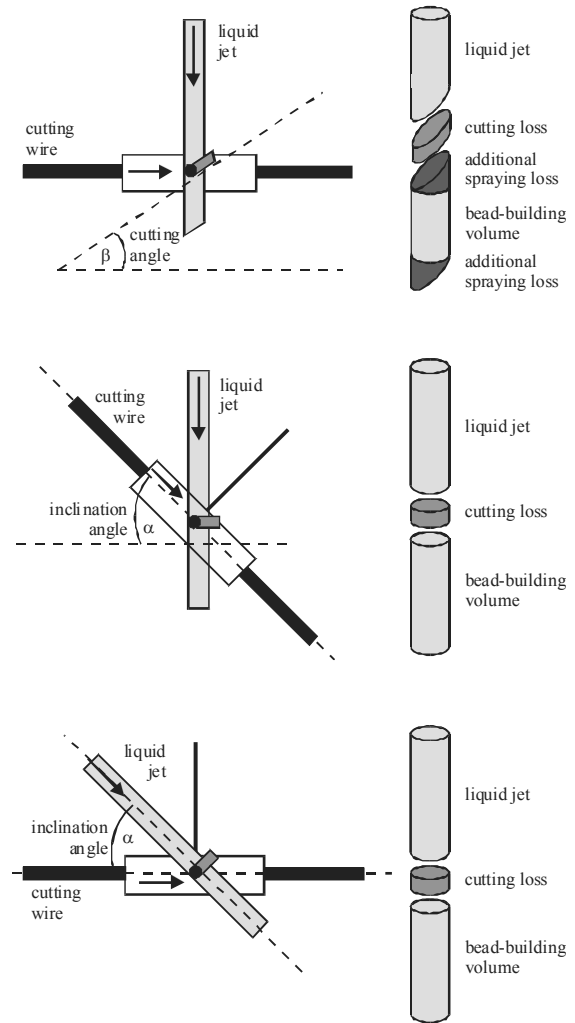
Possible arrangements of nozzle and cutting tool and resulting losses, from top to bottom: perpendicular arrangement, inclined cutting tool, inclined nozzle
